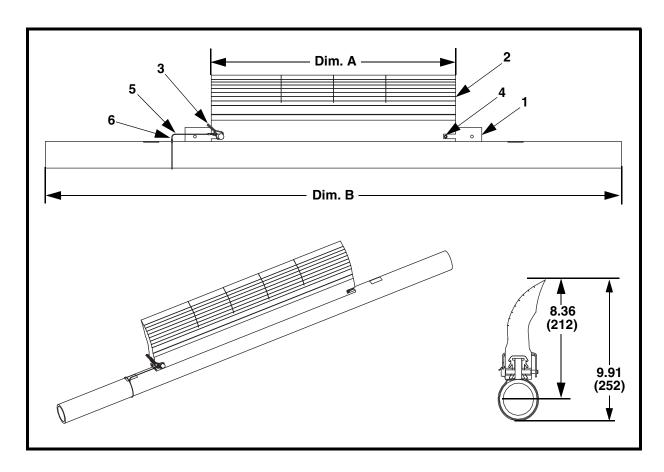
Martin[®] QC1TM Cleaner PD Assembly, P/N 38556-XXXXXXXXX
